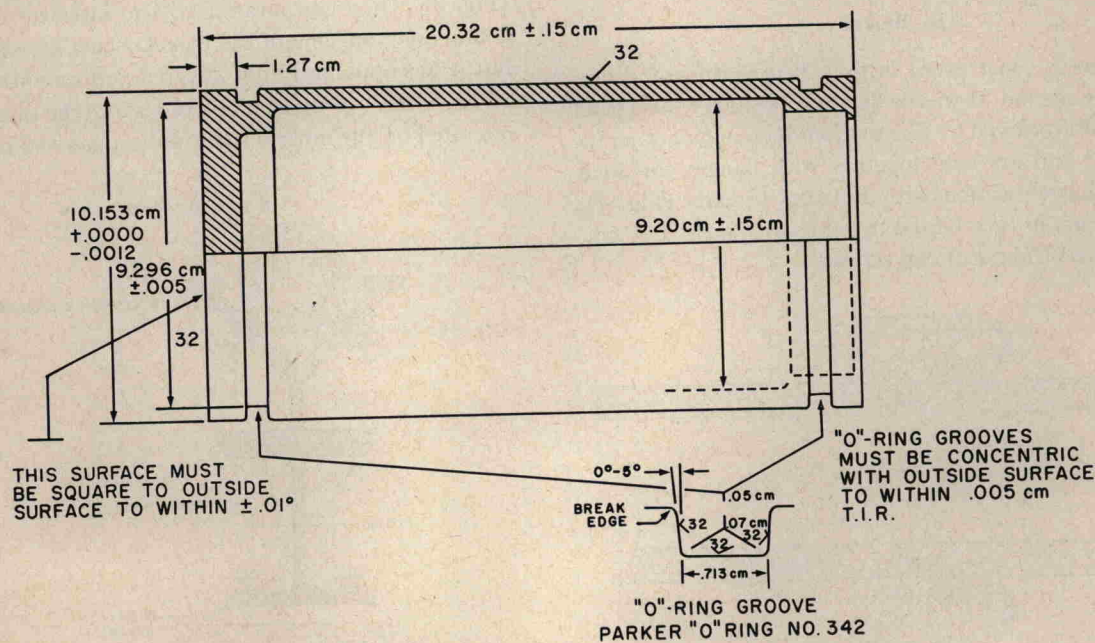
Drawing of "standard" projectile. Material is 6061-T6 aluminum.
